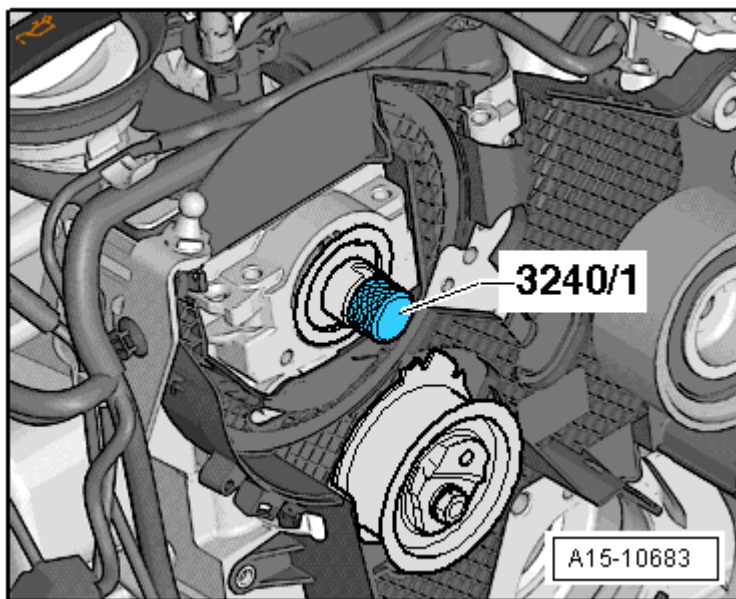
Identifying Thrust Piece 3240/1 Inserted In Camshaft
